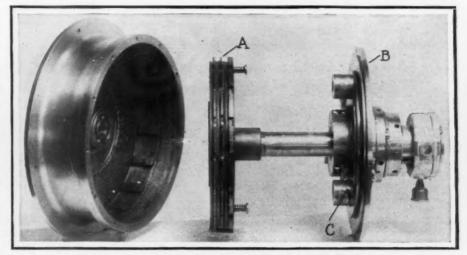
HILLIARD CLUTCH PARTIALLY DISASSEMBLED
